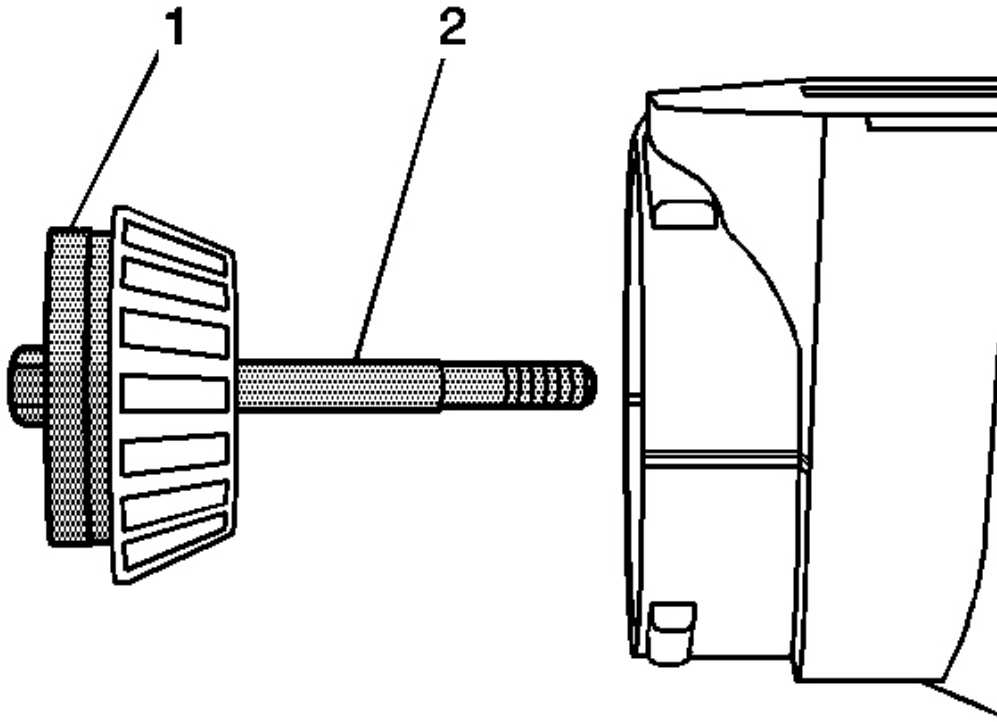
View Of J 33838-2 & Outer Pinion Bearing
